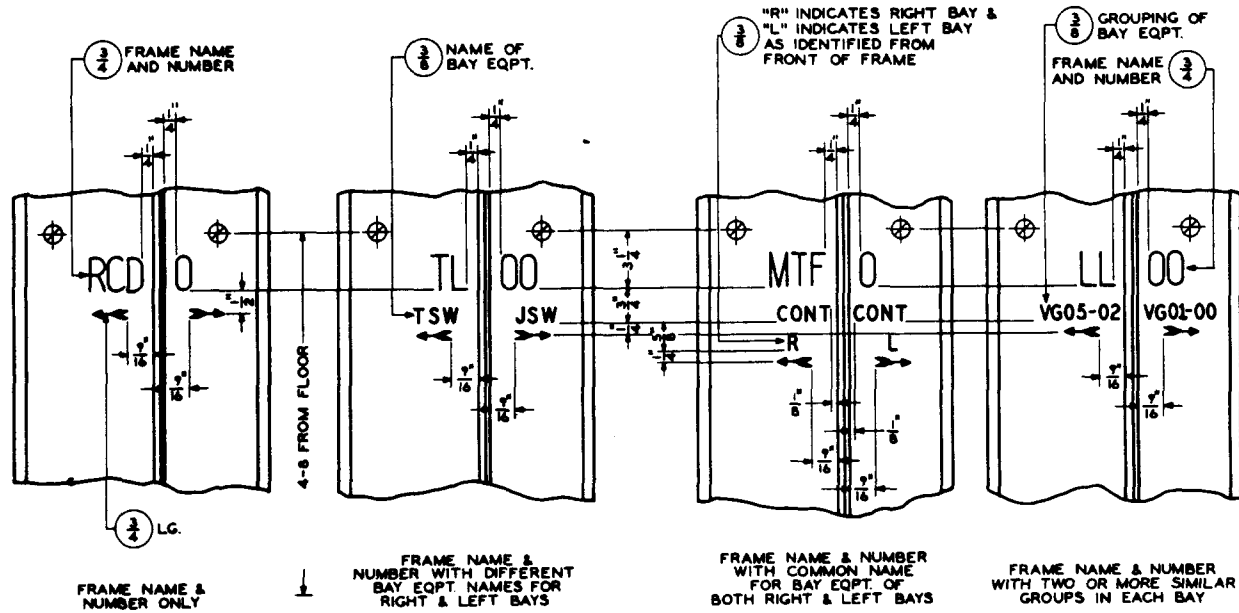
Fixed Rear Covers (When Furnished) of Center Uprights, When Facing Rear of Frame, of Double-bay, Box-type Frames (Except Relay Rack)
